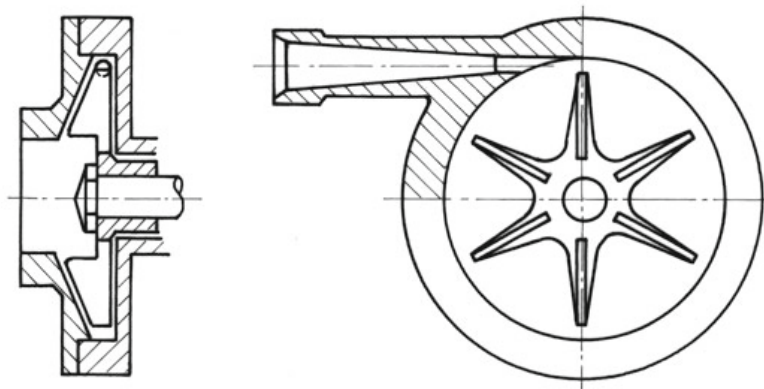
Cutaway schematic layout of a partial emission pump [22].
